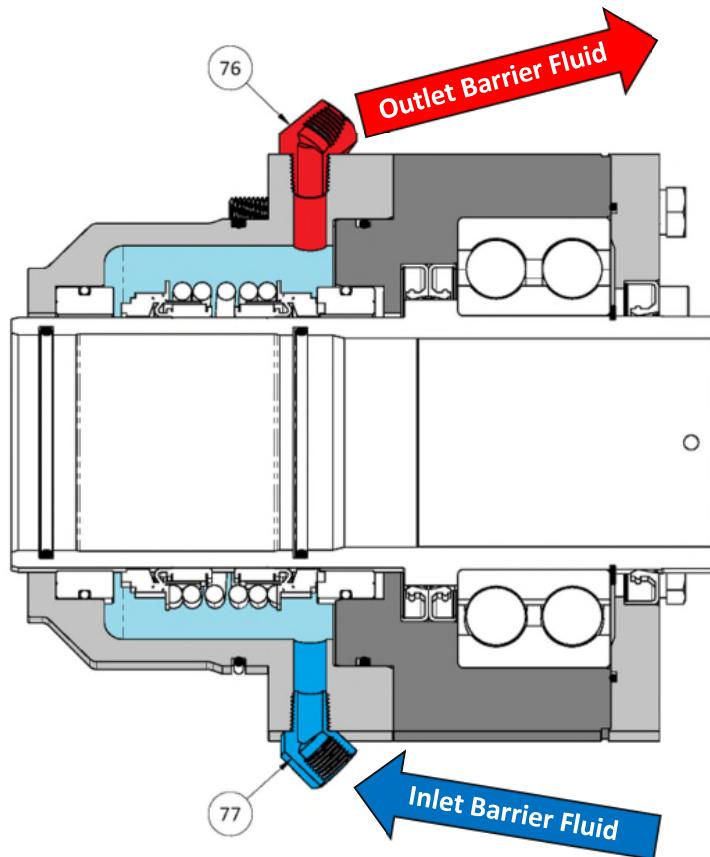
Mechanical Seal Assembly – Inlet & Outlet Plumbing
